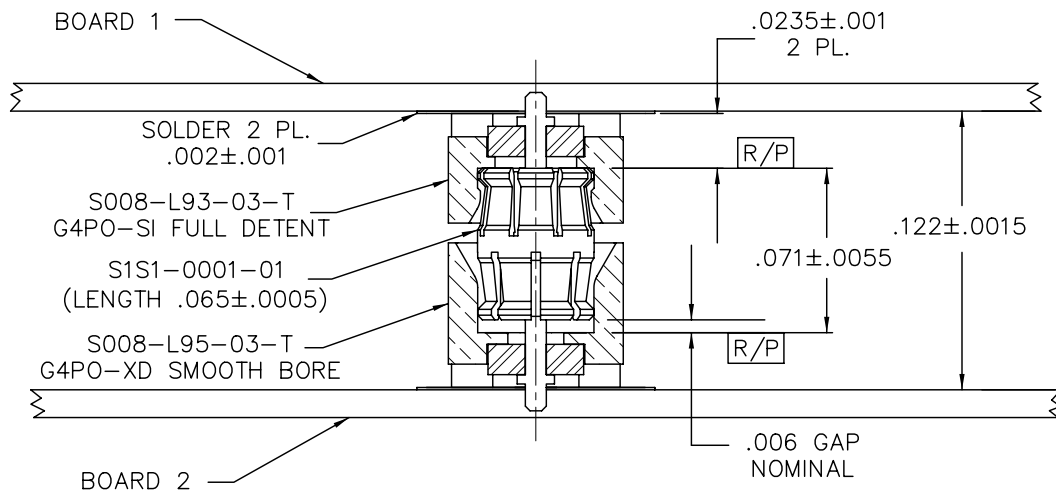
G4PO Board-to-Board Tolerance Analysis
